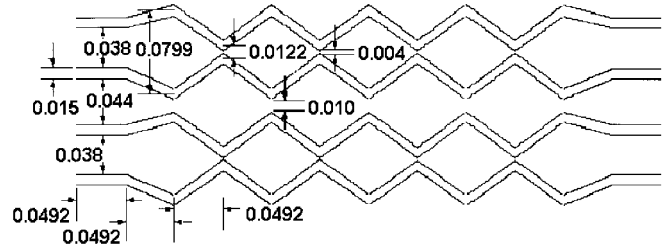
Flex circuit coupler conductor dimensions in inches.
